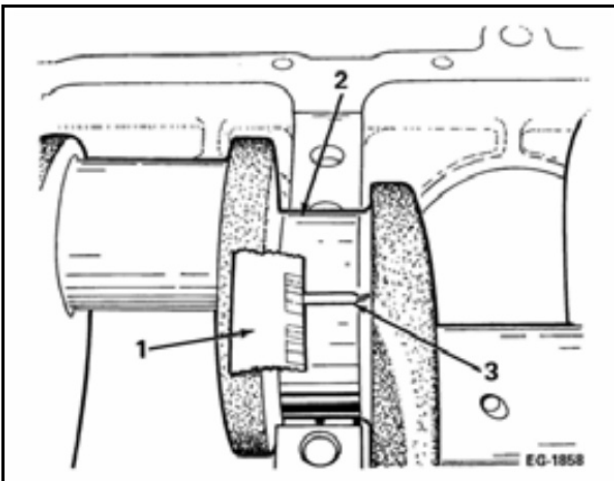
Checking the Bearing Clearance of the Crankshaft Journal
